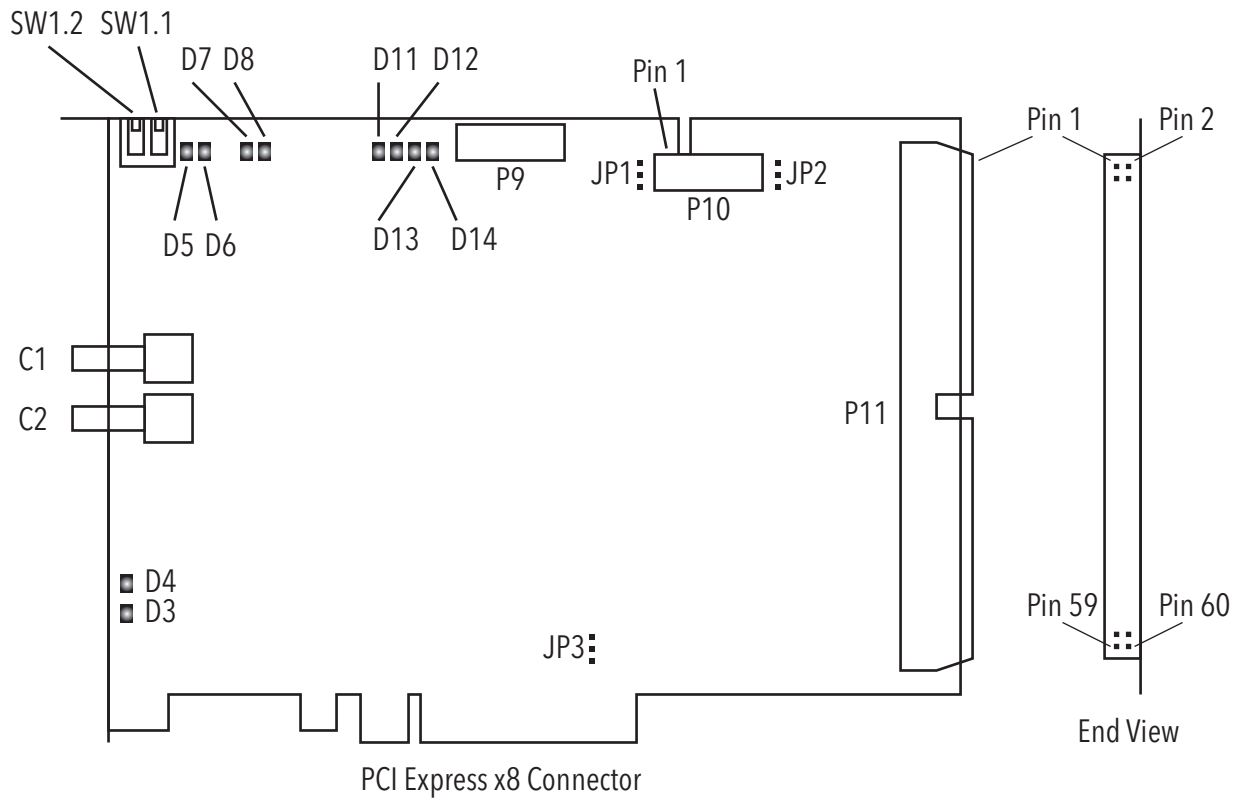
Cyton-CXP2 Board Layout (Rev 6.0 or later)
